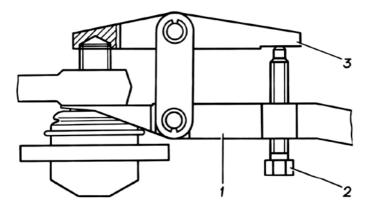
Ball pin puller: 1 and 3 - arms; 2 - bolt
